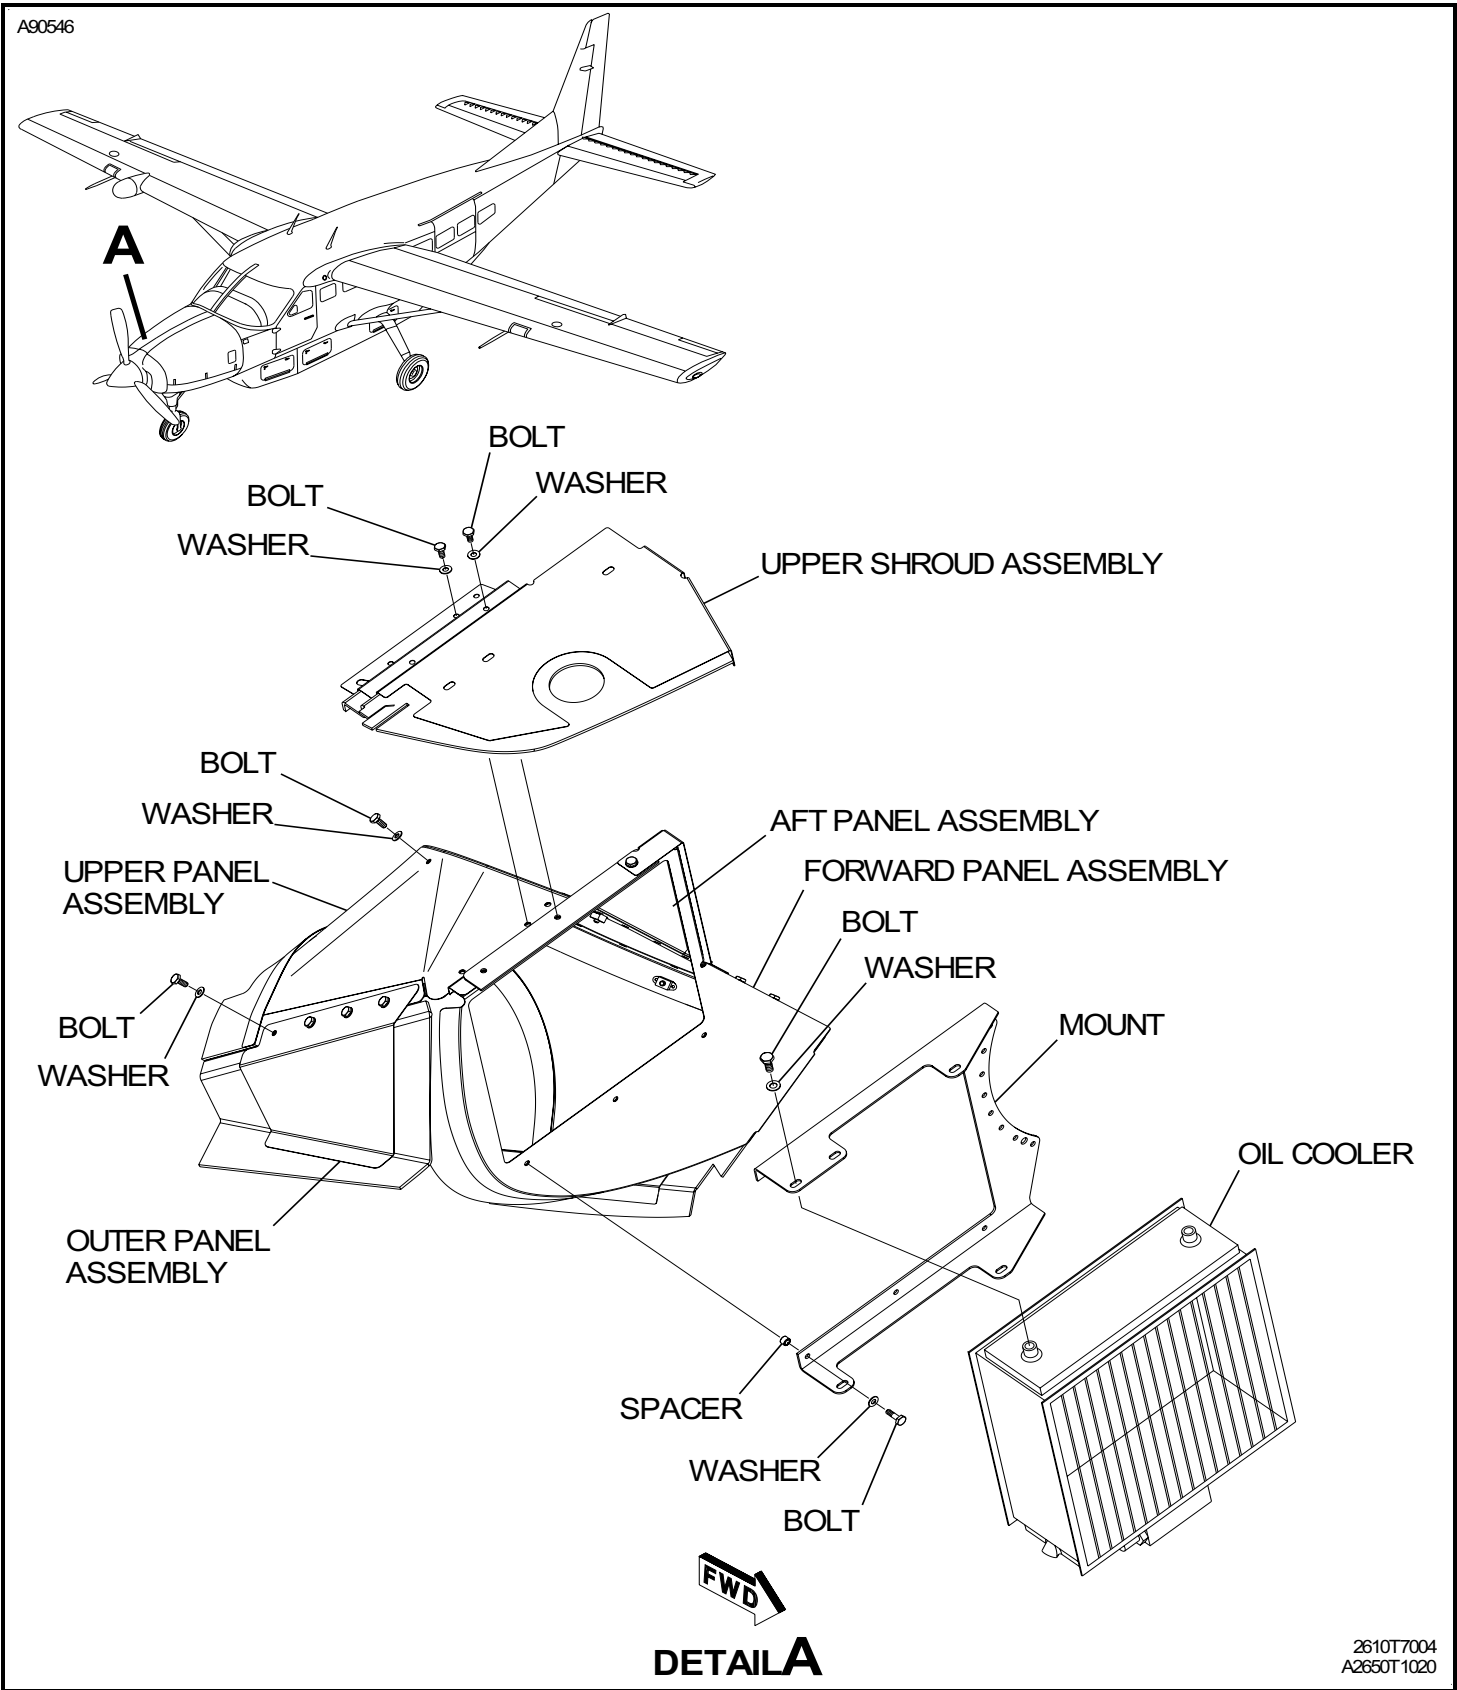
Sheet 2 : Oil Cooler Shroud Components Installation
